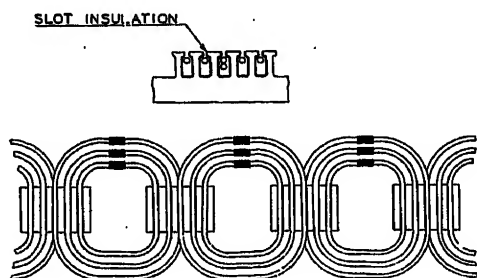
DAMPING WINDING PREVENTING SHIFTING OF FIELD FLUX
